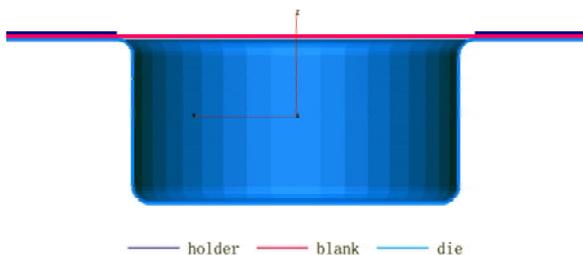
Models of die and holder and sheet in hydro-bulging process.
